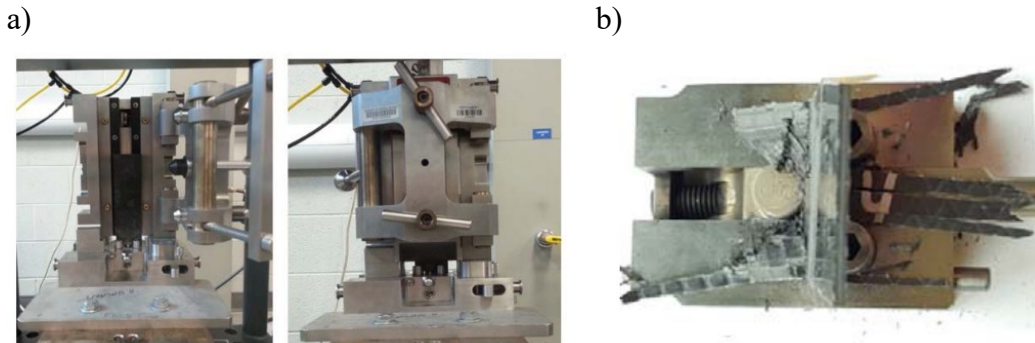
a) anti-buckling fixture for crashworthiness test designed by Engenuity [64]; b) specimen tested in tearing failure mode using the fixture of Engenuity [64].
